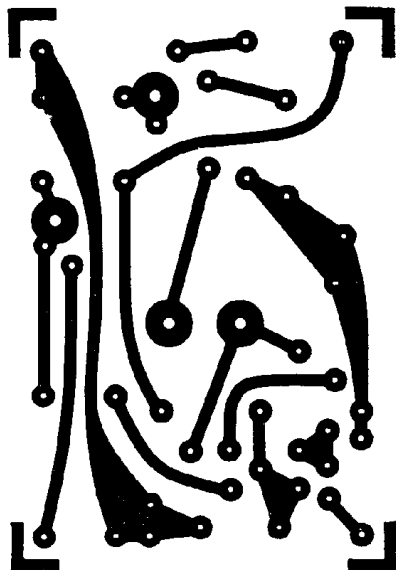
Drawing shows, in actual size, the resist pattern to be copied if you make your own PC board.
